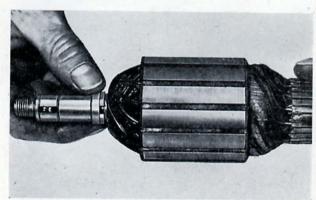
Locating the shaft collar retaining cup on the drive end of the armature shaft
